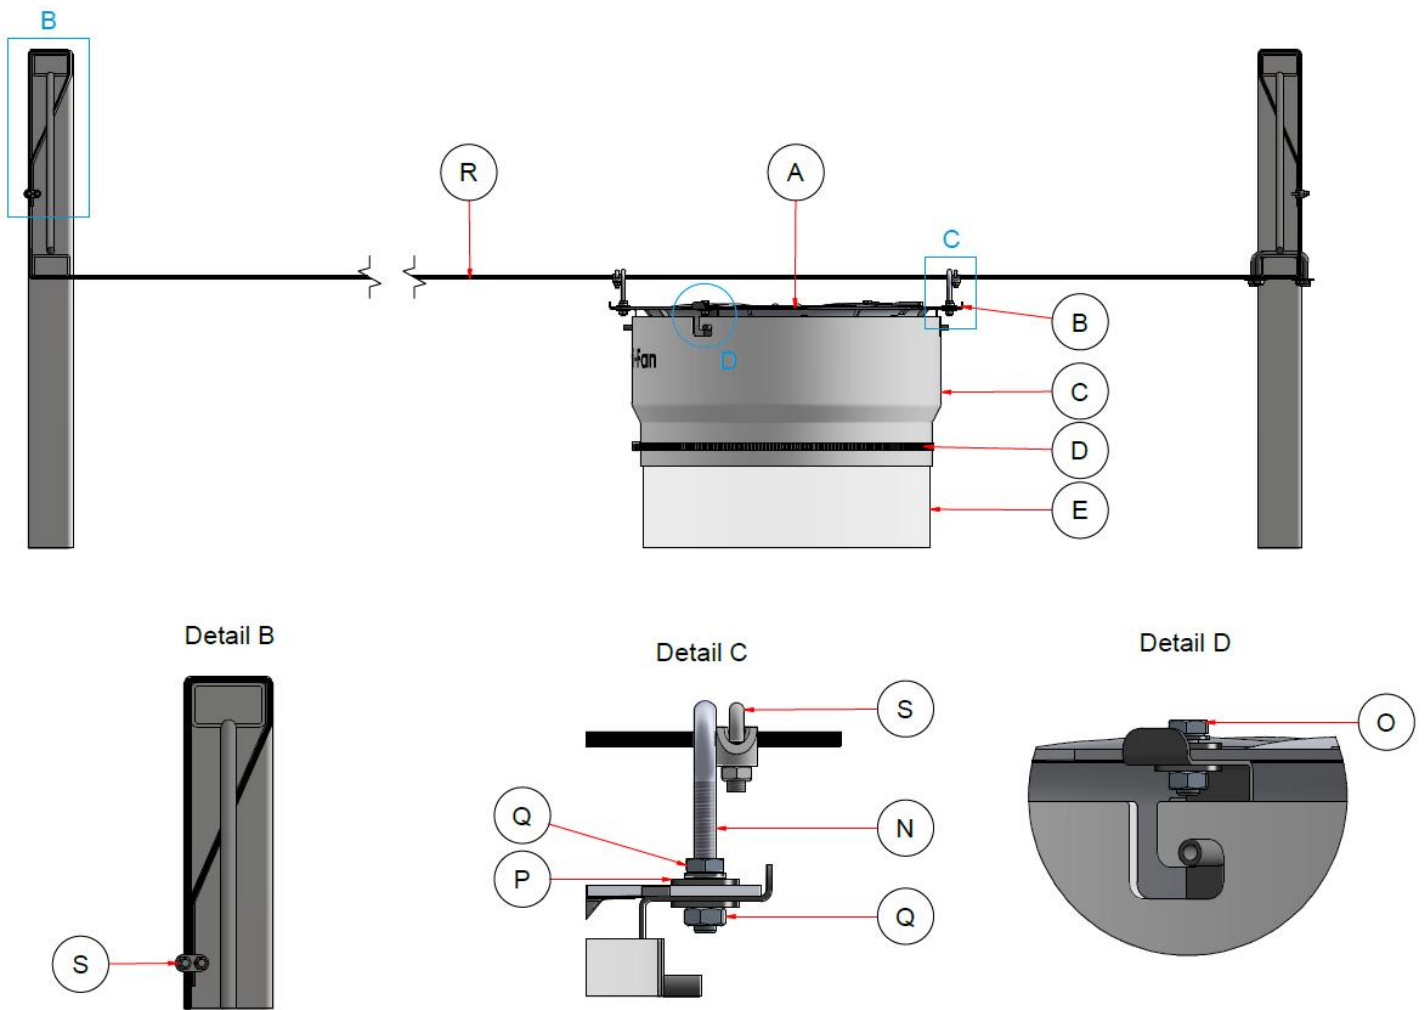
Schematic drawing of a Verti-Fan suspended with the aid of a steel cable
